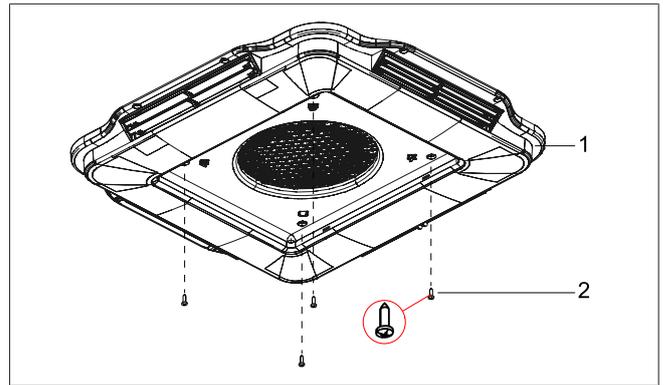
Fixing the air distributor assembly to the mounting bracket
